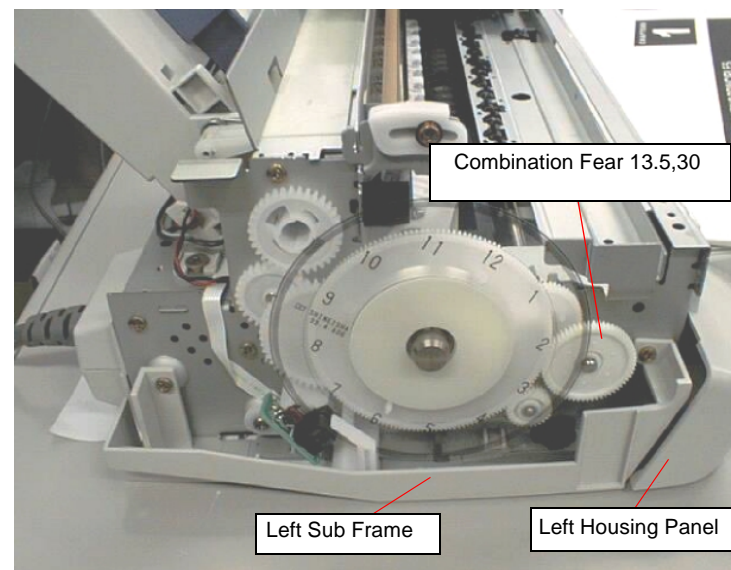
Combination Gear 13.5, 30 & PF Encoder Sensor
